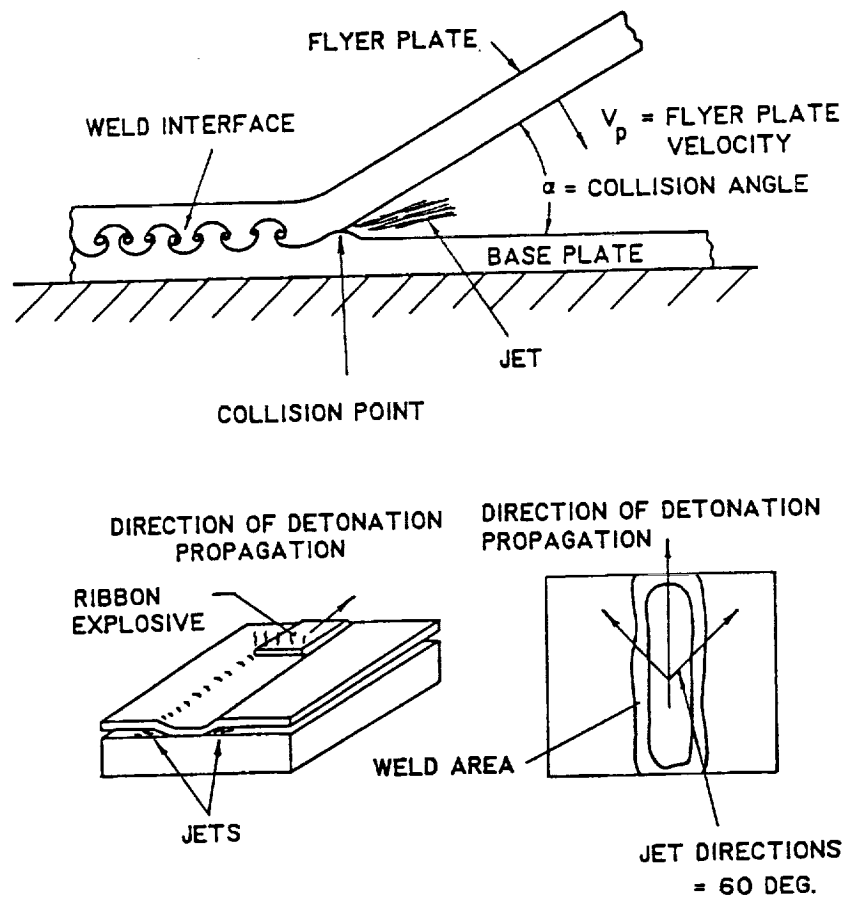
High-velocity, angular impacts of the two explosive joining processes: cladding in the top sketch and the NASA explosive seam welding in the bottom sketch.
